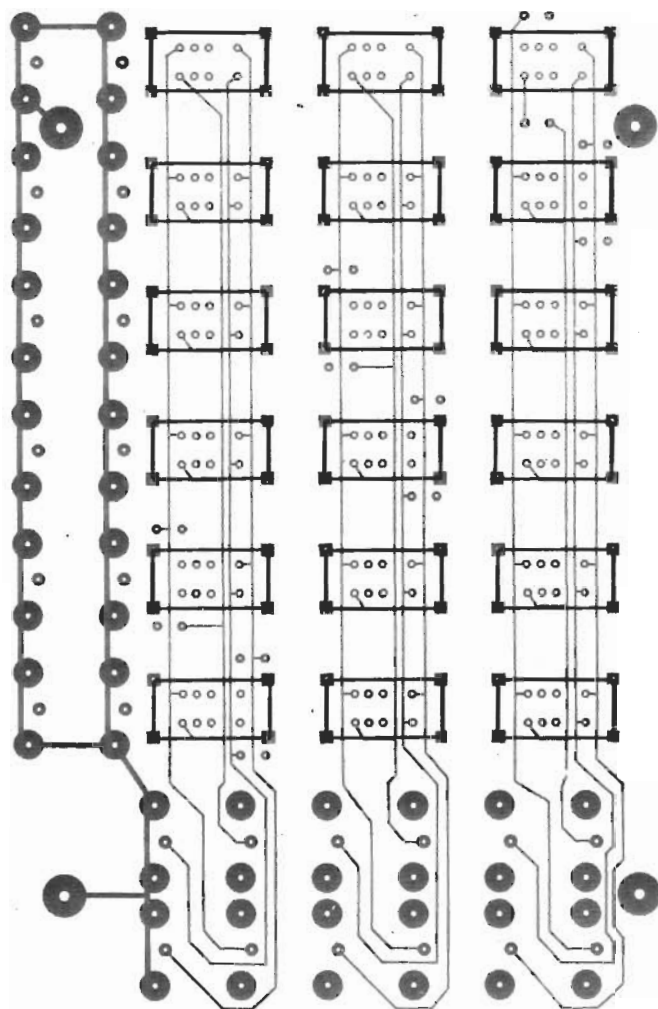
Top side loading diagram shows switches inserted from the component side of the pc board.
